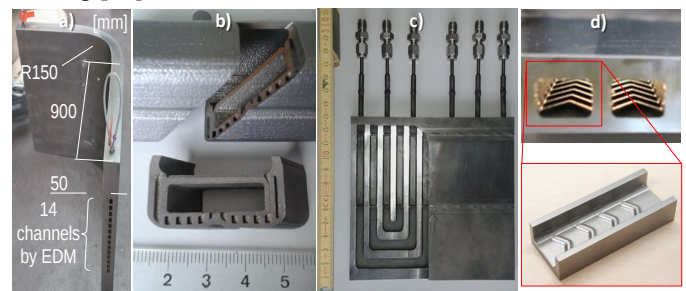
Technology demonstrators: a)  $\frac{1}{2}$  FW mock-up by EDM; b) multichannel divertor mock-up produced by SLS; c) hybrid production of complex parts by SLS and conventional CNC machining joined by EB welding; d) Rib-roughened FW cooling channels through die sink EDM.
